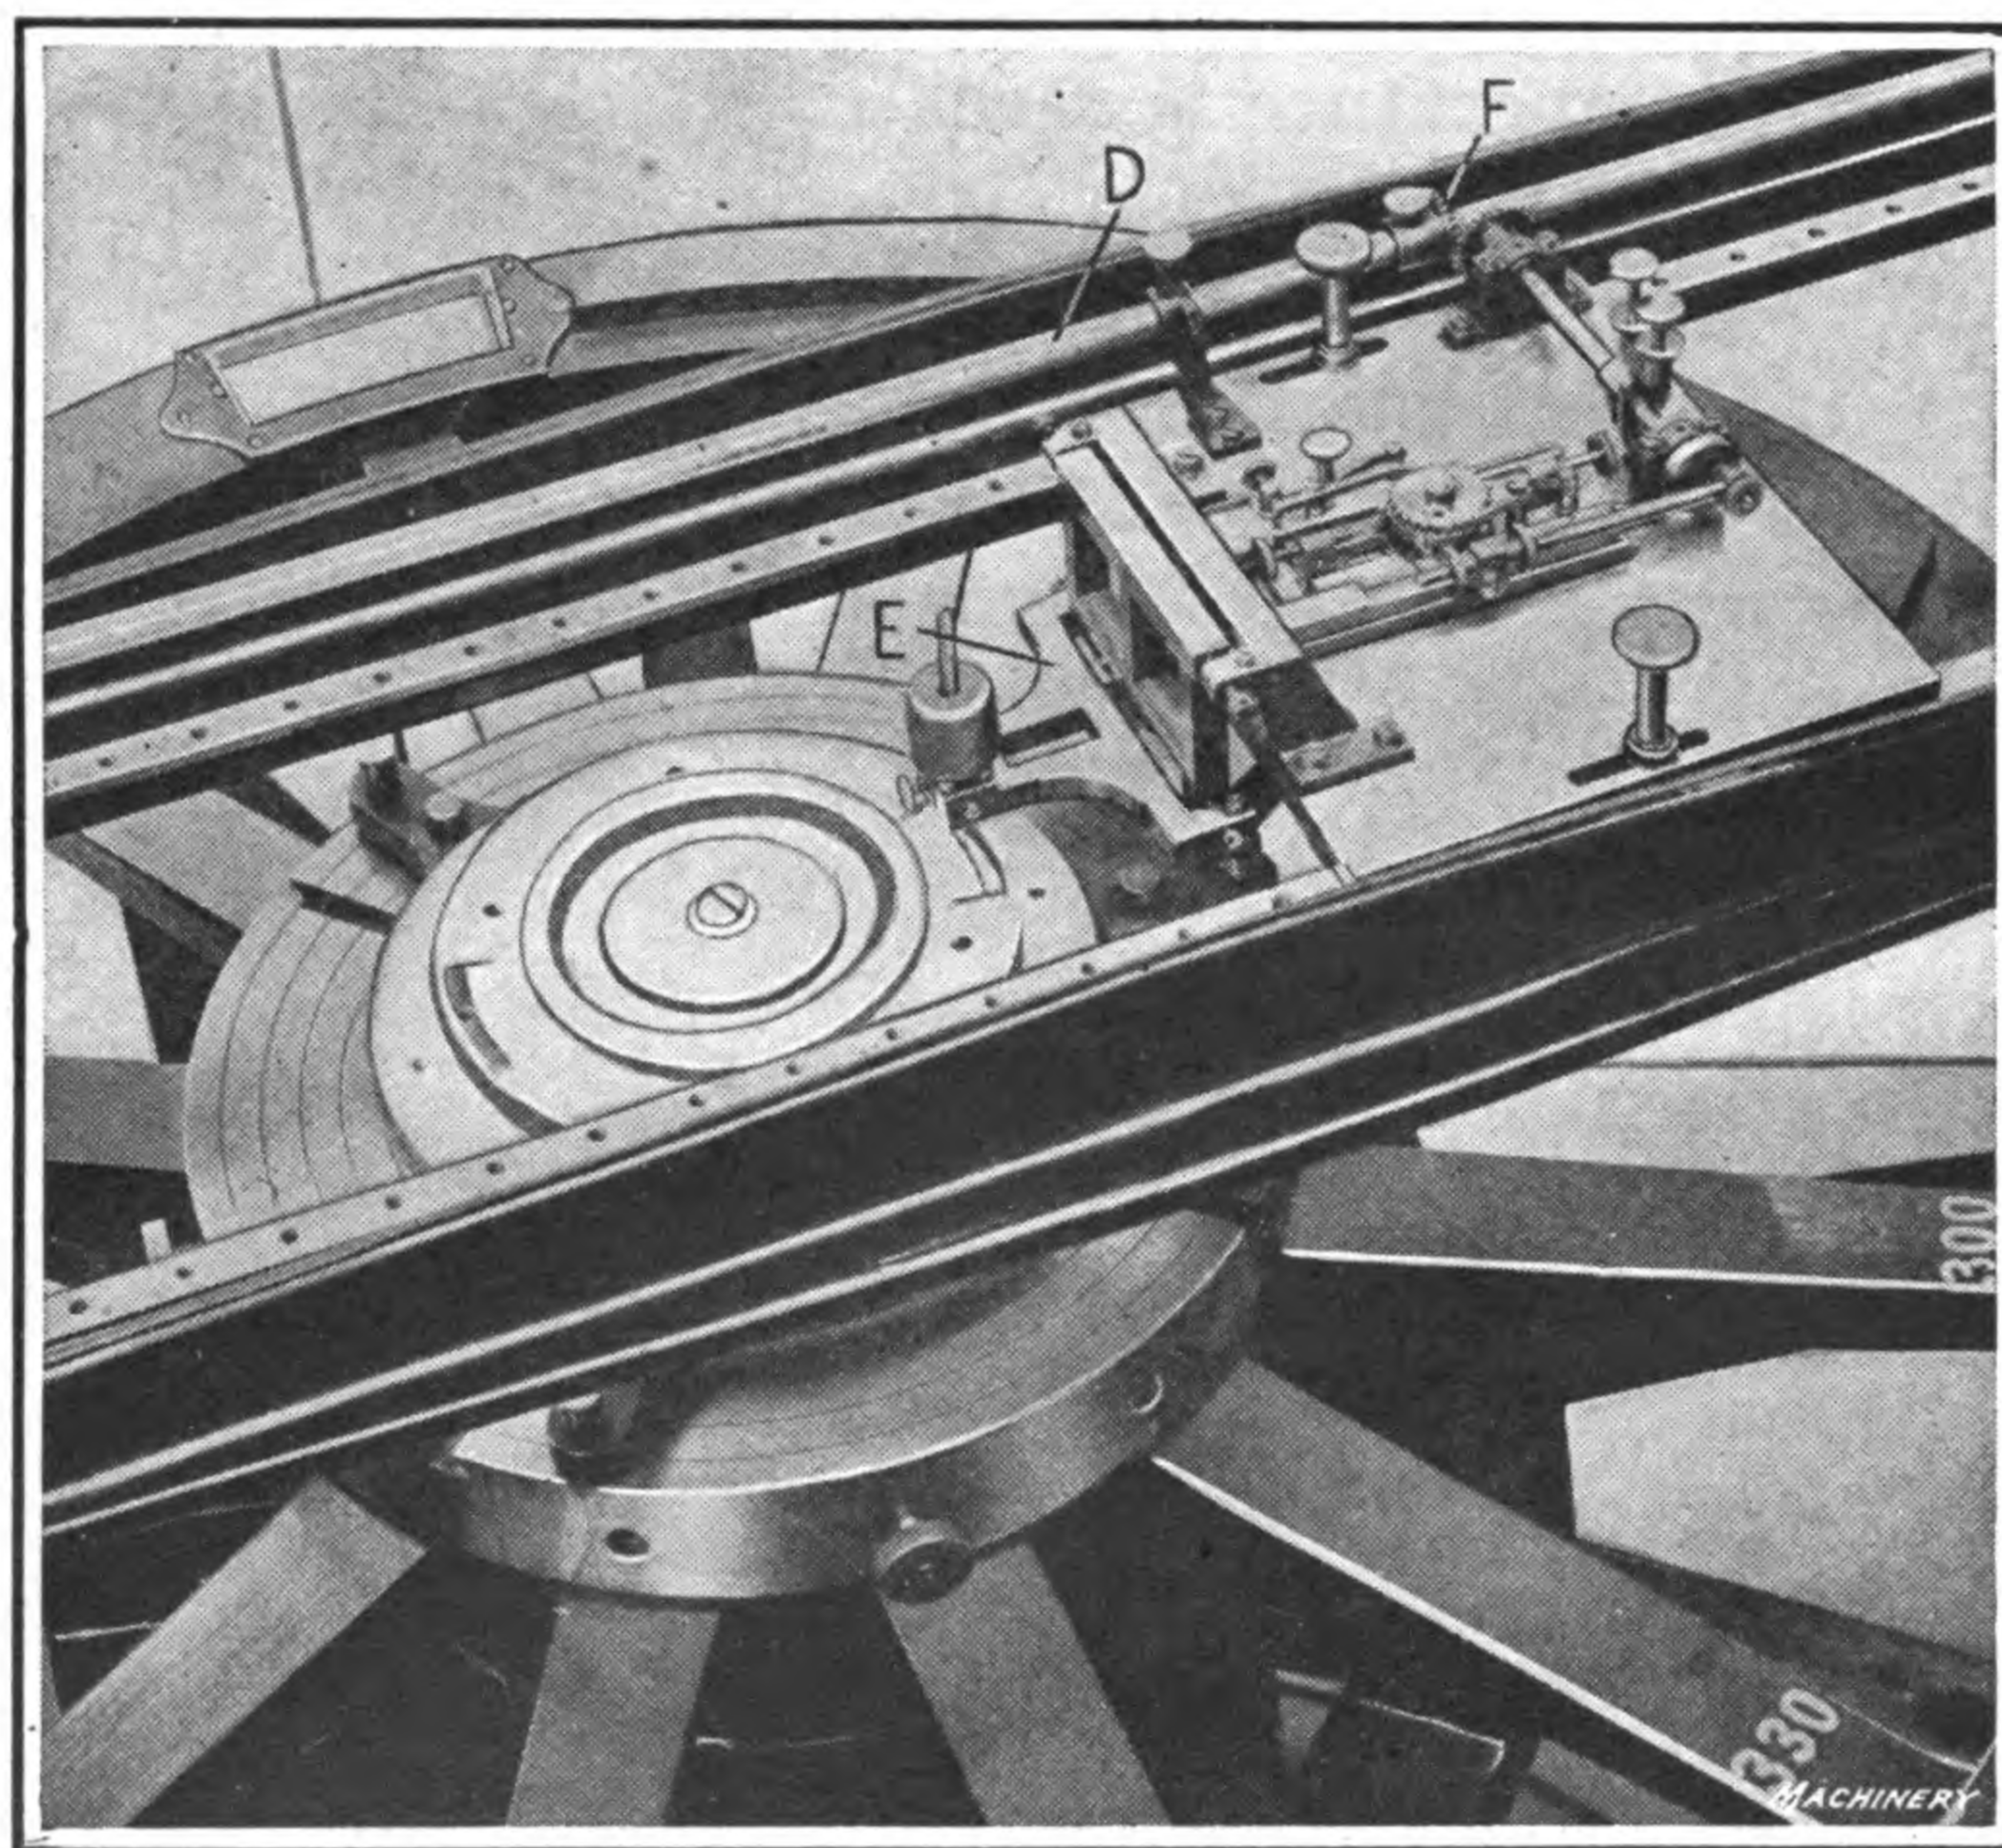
Close View of Tool Carriage Mechanism of Graduating Machine shown in Fig. 4
